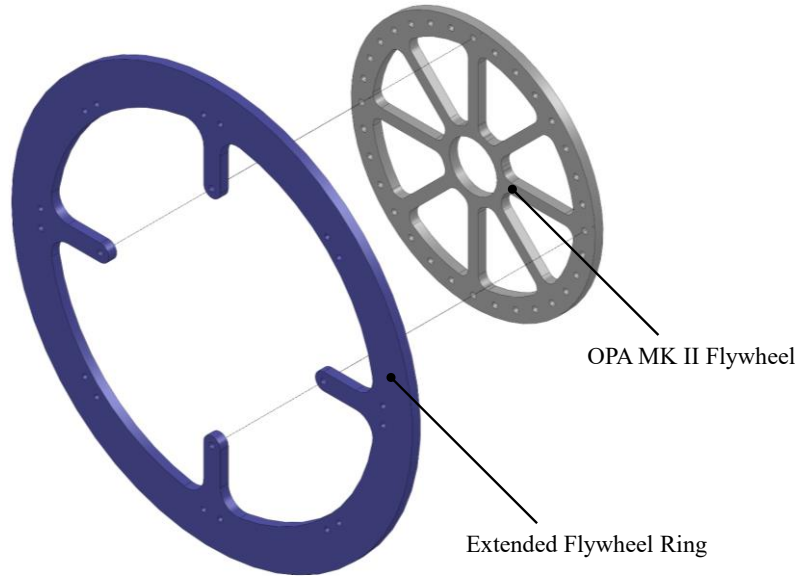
Exploded View of the OPA MK III Flywheel Assembly
